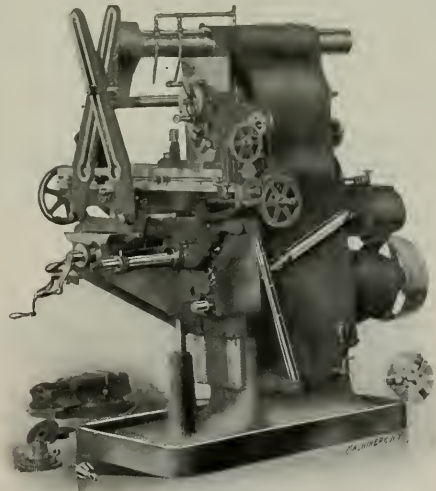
Right-hand Side of Universal Miller, showing Oiling Arrangement and Spiral Head
